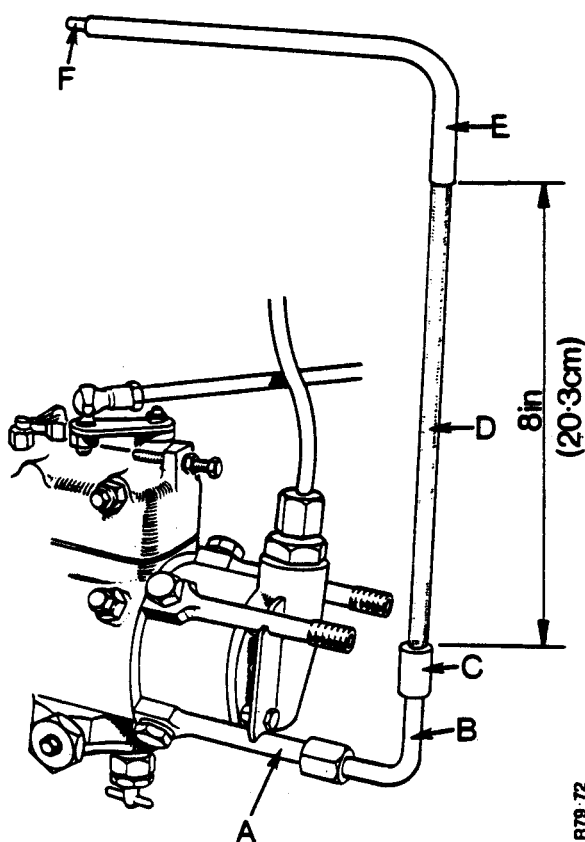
EQUIPMENT FOR SPILL TIMING
